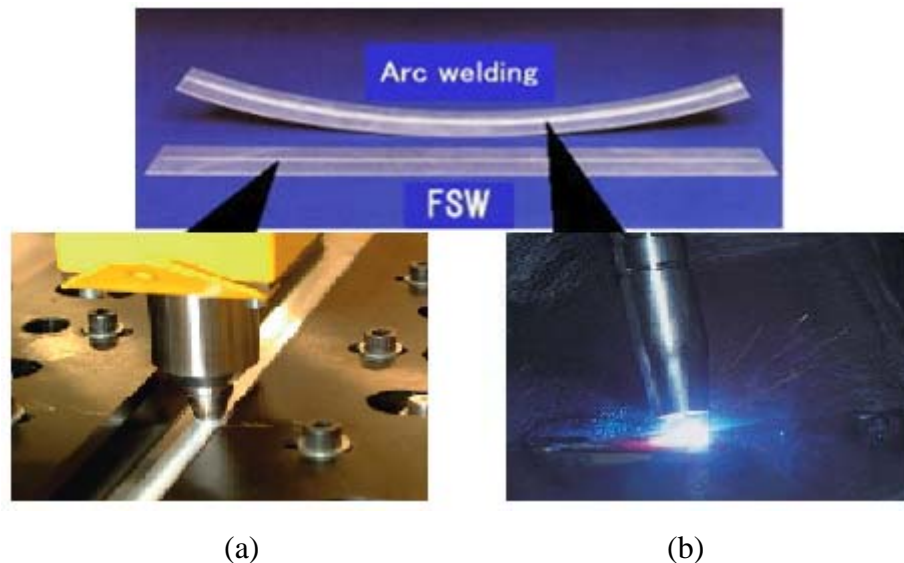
Welding Technology (a) Friction stir welding (FSW) process [5] (b) Metal inert gas welding [6]
